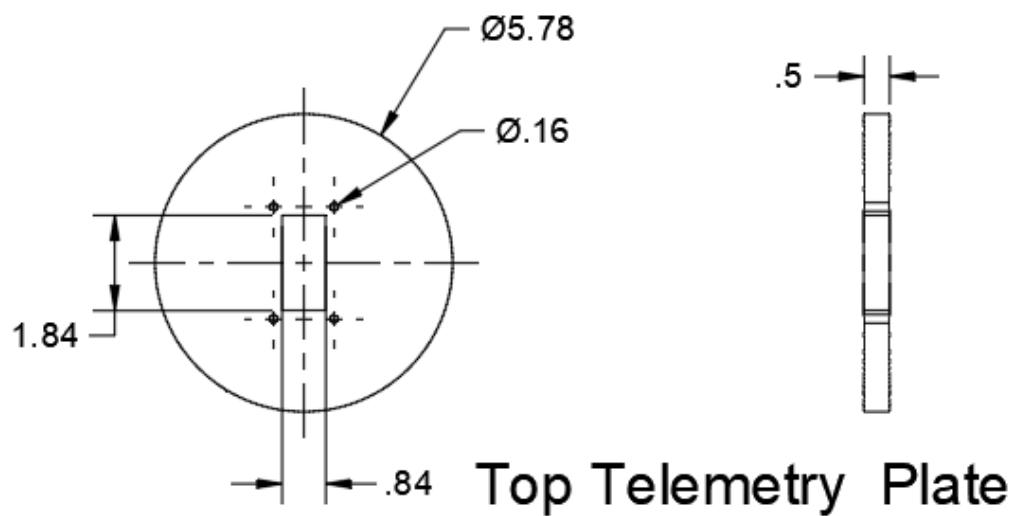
Top Telemetry Bay Plate Dimensioned Drawing
